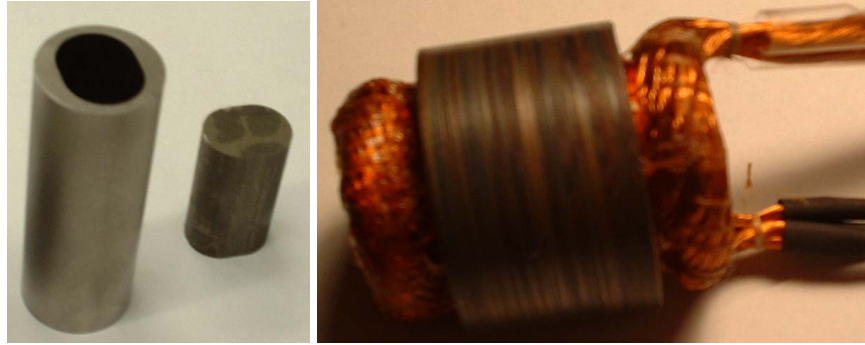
Hollow shaft and magnet Figure 31. Stator and winding
